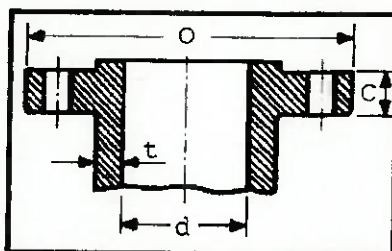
Flange "Long Neck Welding"
